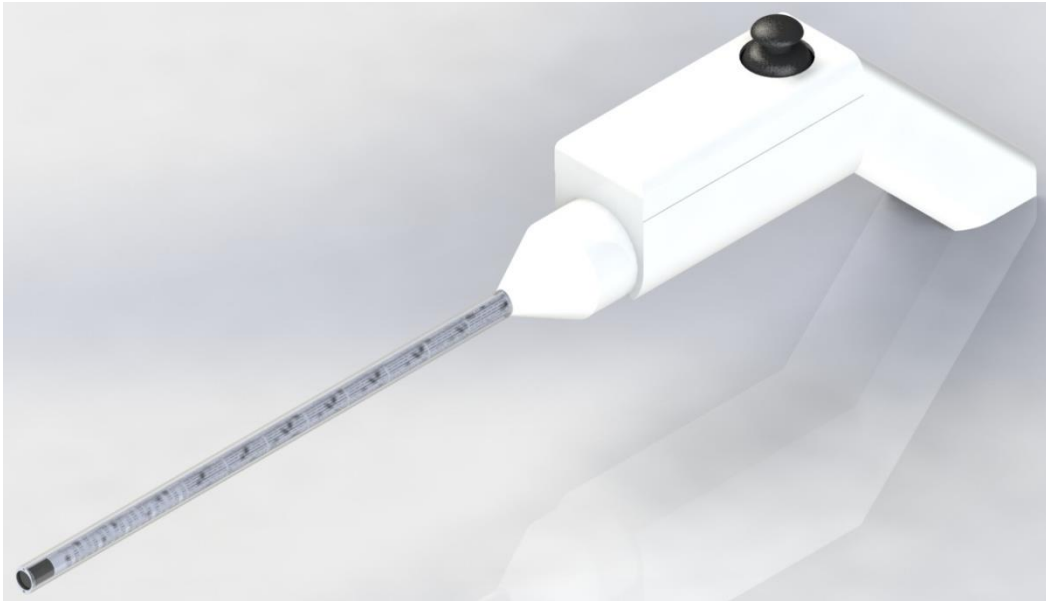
Prototype 2 Concept. The changes made to the prototype included a handheld grip and potentiometer joystick to control the bending mechanism that had improved bending and added directions.
